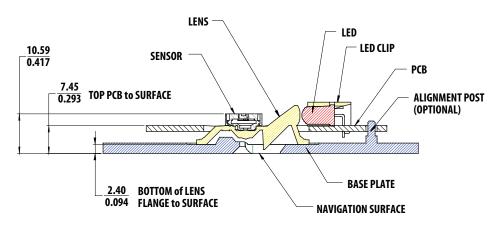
Recommended PCB Mechanical Cutouts and Spacing
